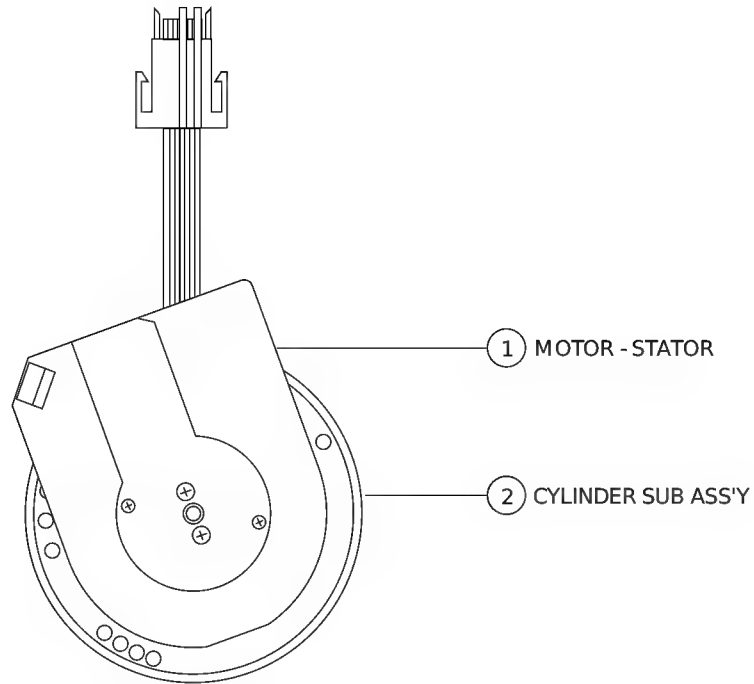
Assembly of Motor Stator and Cylinder Sub Ass'y
